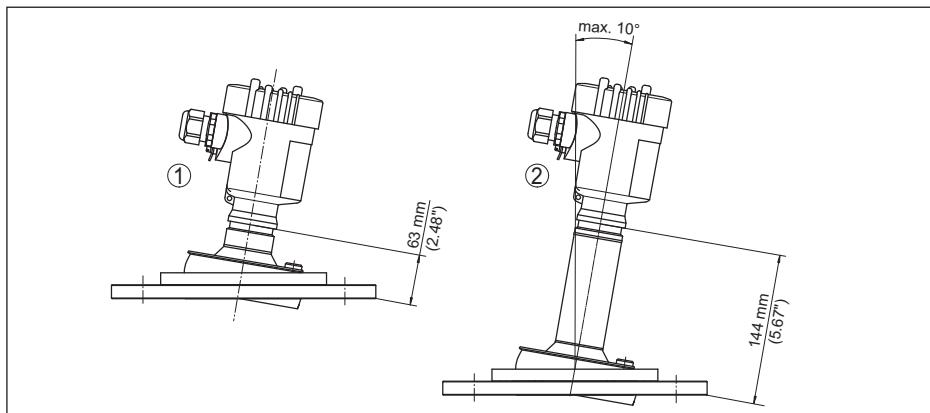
VEGAPULS 6X, flange with lens antenna (flange thickness acc. to drawing, flange dimensions acc. to DIN, ASME, JIS)
